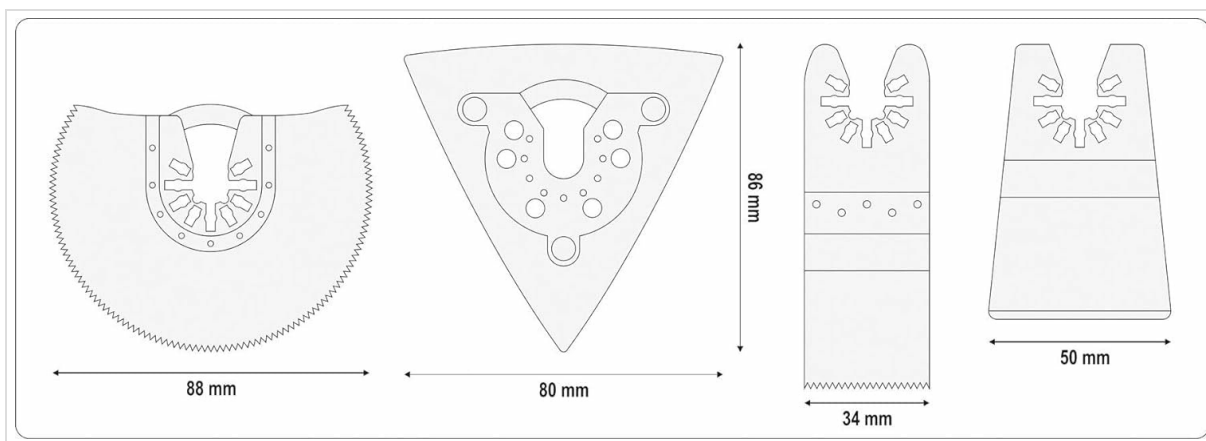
Various oscillating tool accessories with dimensions. This image illustrates different types of blades and sanding pads compatible with the tool, including a semi-circular saw blade (88mm), a triangular sanding pad (80mm x 86mm), a straight cutting blade (34mm wide), and a scraping blade (50mm wide). Dimensions are clearly marked.
